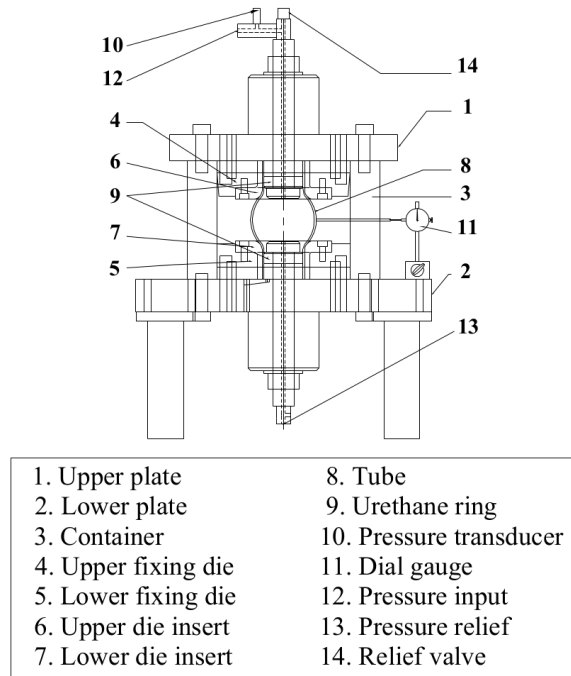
Tube hydraulic testing setup developed by Hwang et al [54].
